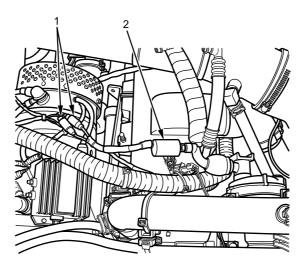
Engine Wiring Harness and Fan Drive Assembly Air Line. (Alternator Removed for Clarity).
